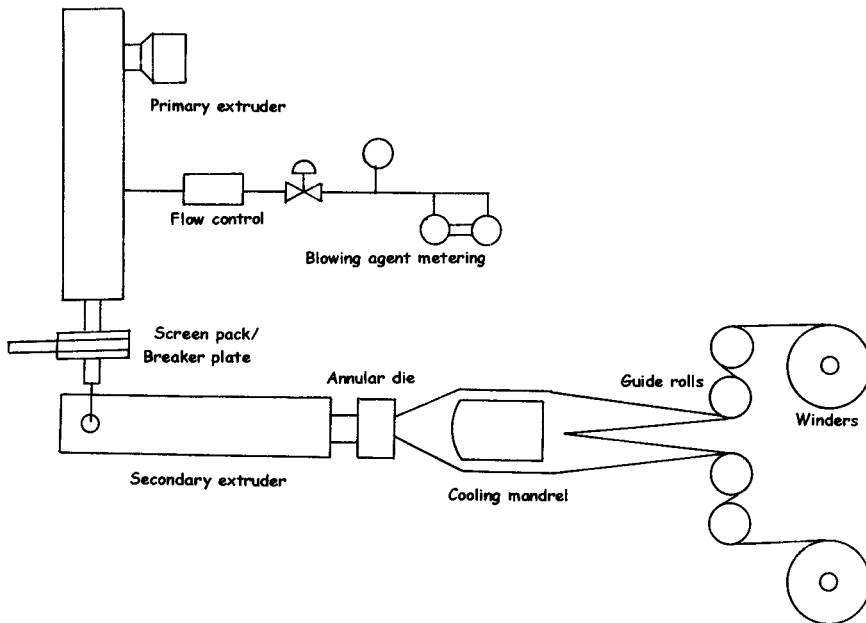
T-style tandem extrusion system, eliminating right-angle crossover or transition pipe
